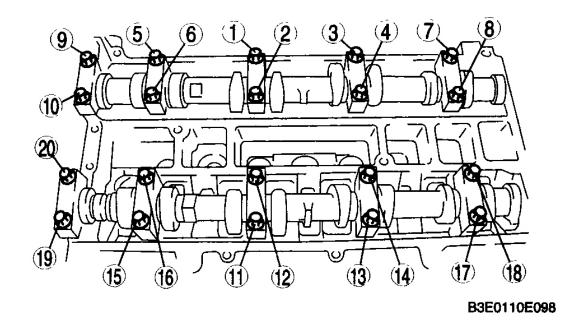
Camshaft Cap Bolt Tightening Sequence Courtesy of MAZDA MOTORS CORP.
